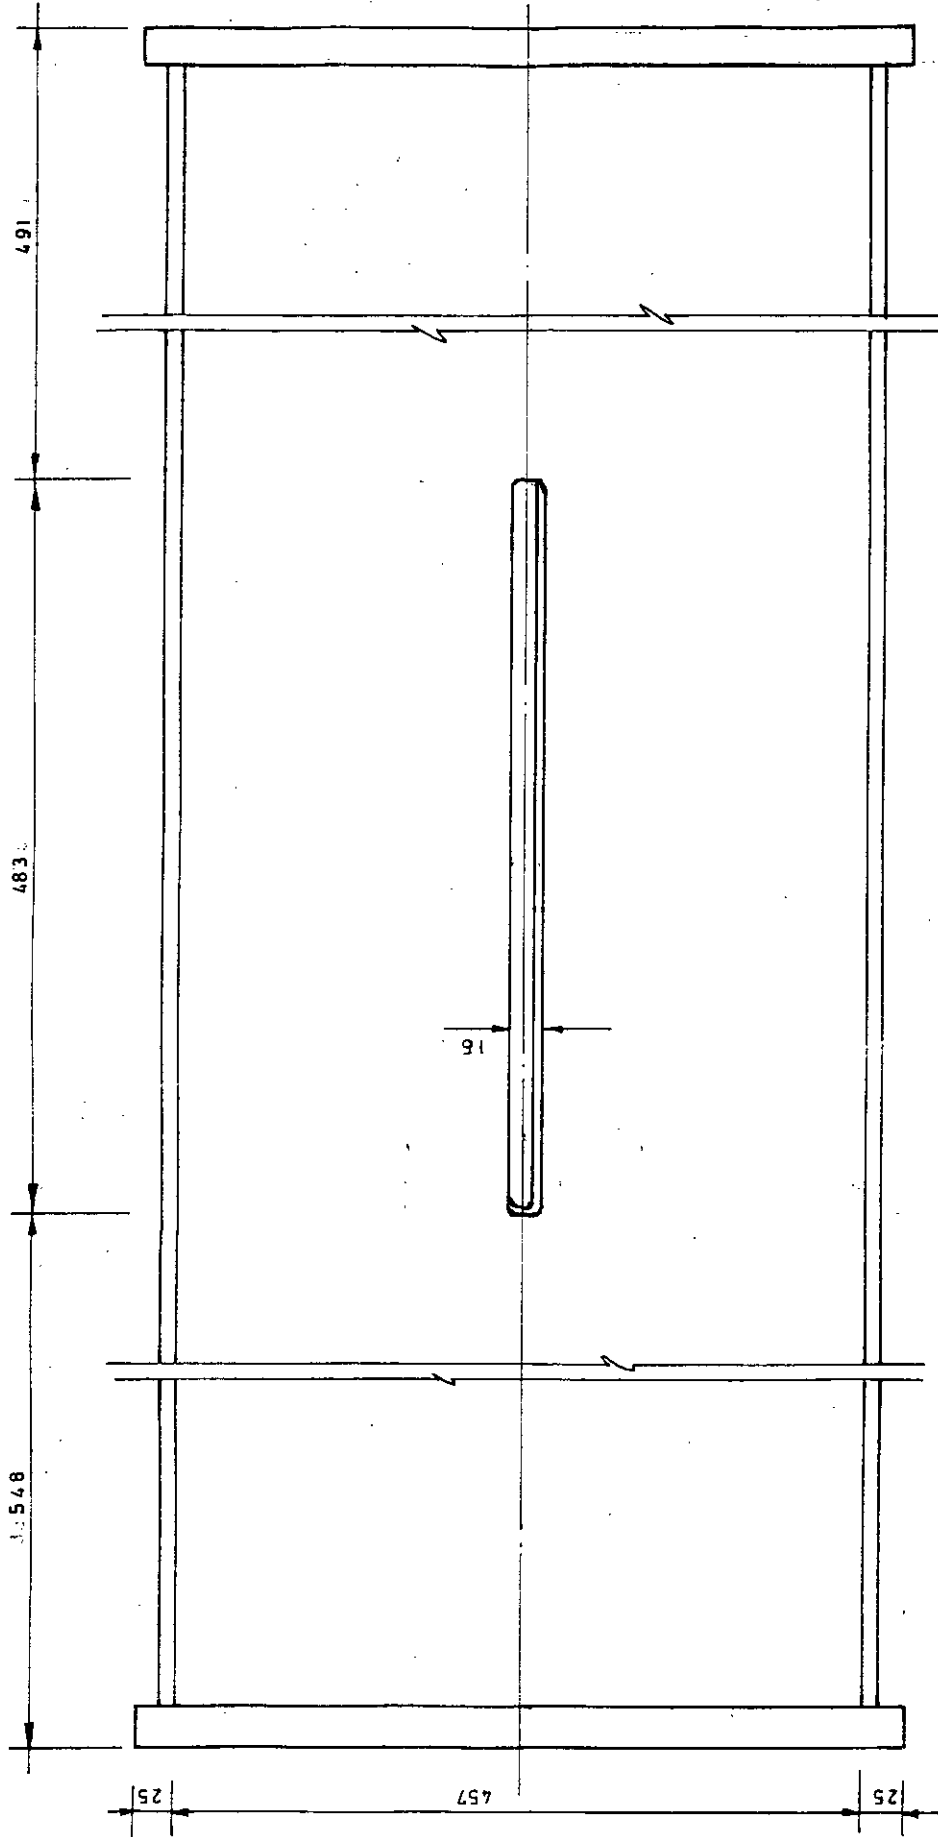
Perspex vertical side wall of the test section (all dimensions are in mm)
